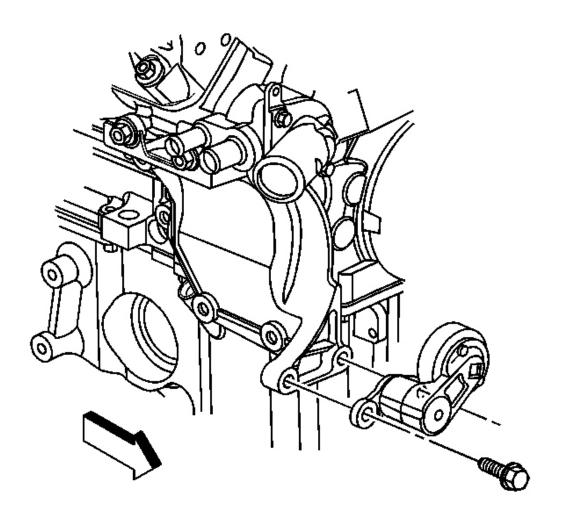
View Of A/C Drive Belt Tensioner & Bolts Courtesy of GENERAL MOTORS CORP.
